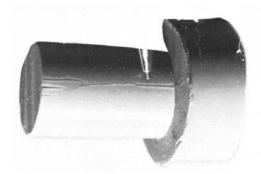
Magnetic Rubber Indications of Surface Cracks in Aircraft Fastener Holes (Produced by Yoke Magnetization DC Continuous)
